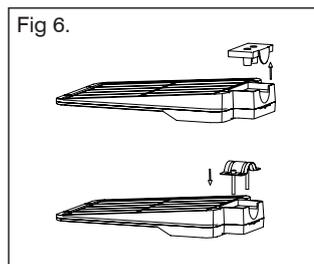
Remove the top cover from fitting and replace with arch-shaped bracket
